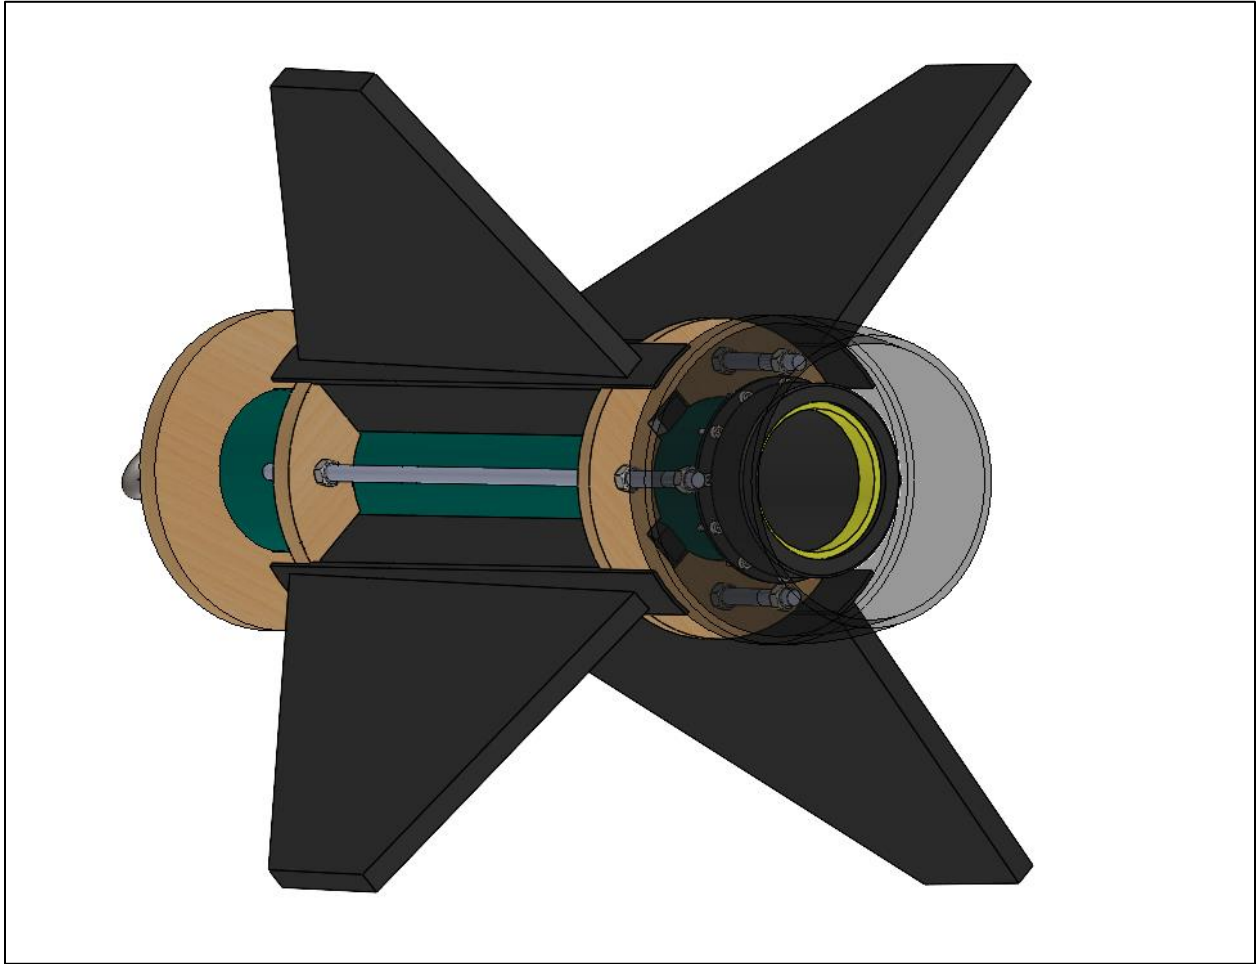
Fin Can Assembly w/ Transparent Tail Cone
